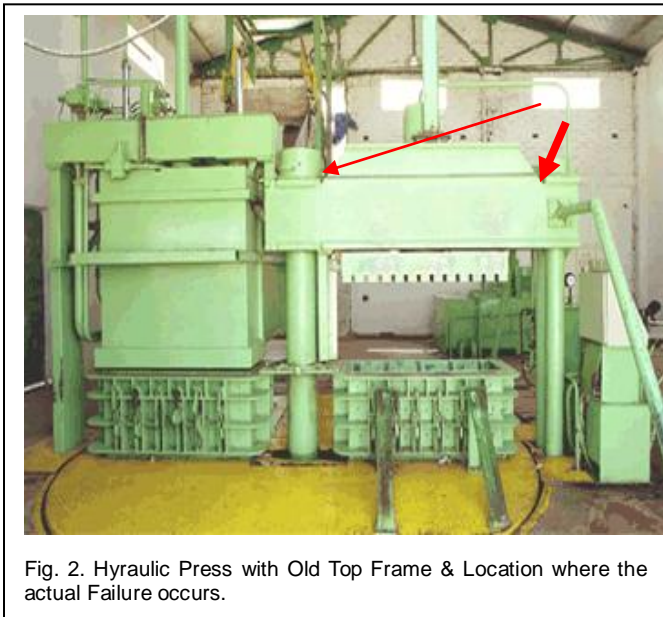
Hydraulic Press with Old Top Frame & Location where the actual Failure occurs.
